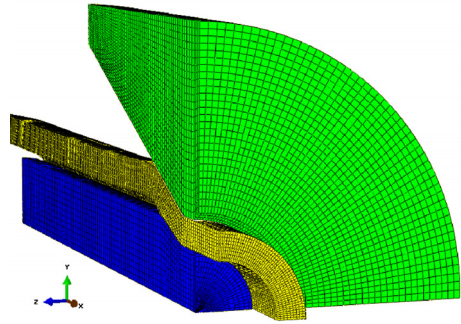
FE model of the ultra high pressure fuel tube drawing process
